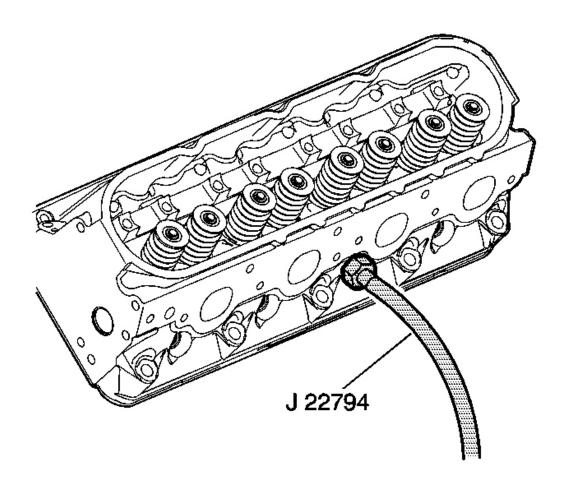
Applying Compressed Air To J 22794 Courtesy of GENERAL MOTORS CORP.
